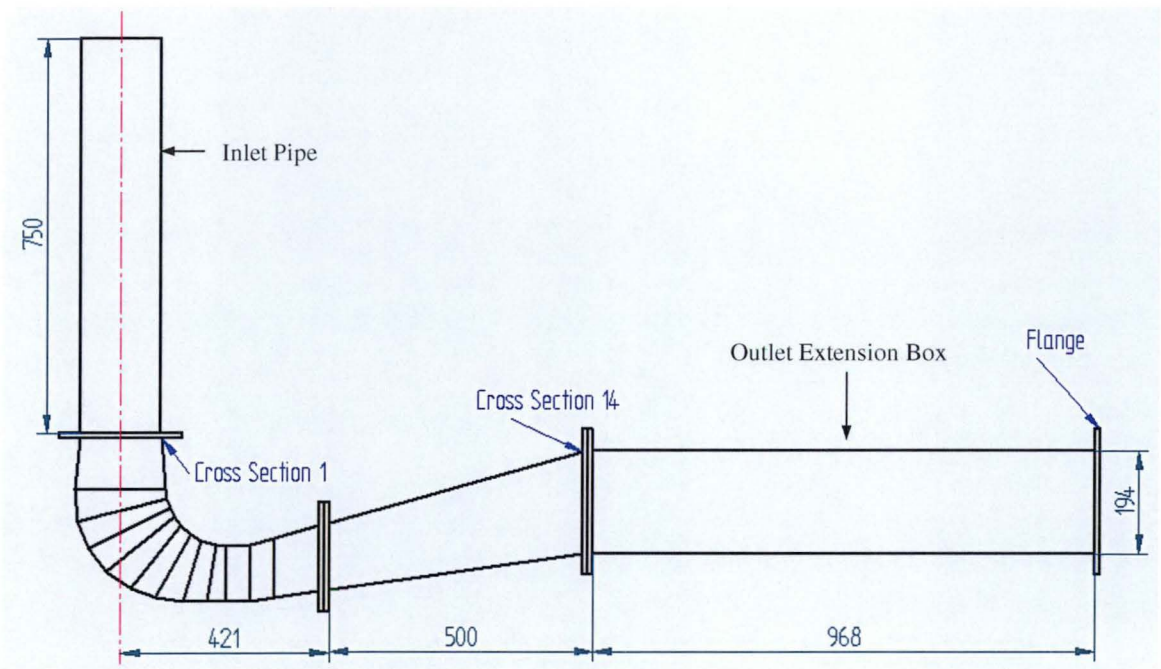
Details of the experimental model used for draft tube flow investigation (All dimensions in mm)
